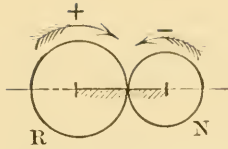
Simple Pair of Gears in Fixed Bearings.
